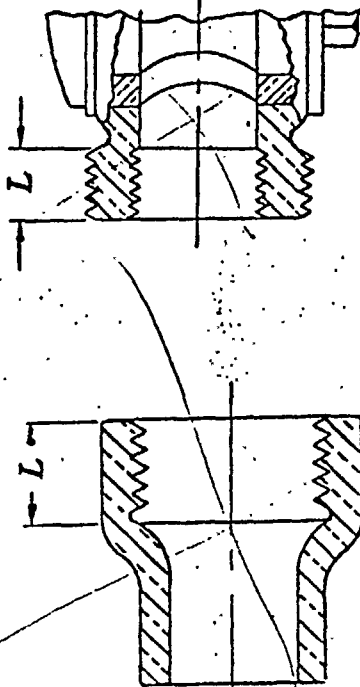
Coupling Nut for Use With Flared Copper Service Tubes, Type K
